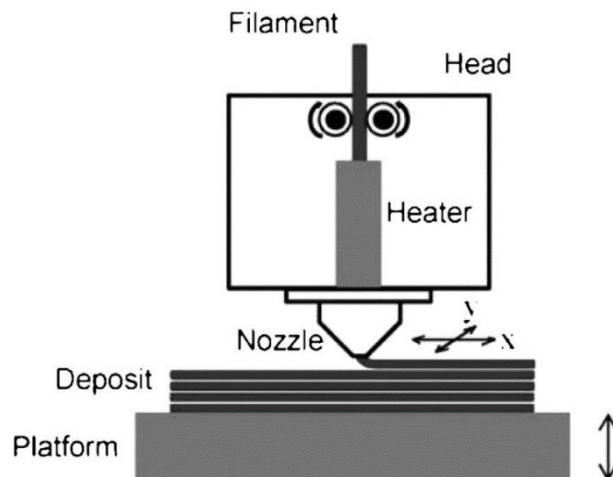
Filament dispensing ME machine for layer-by-layer manufacturing (Singh et al., 2018).
